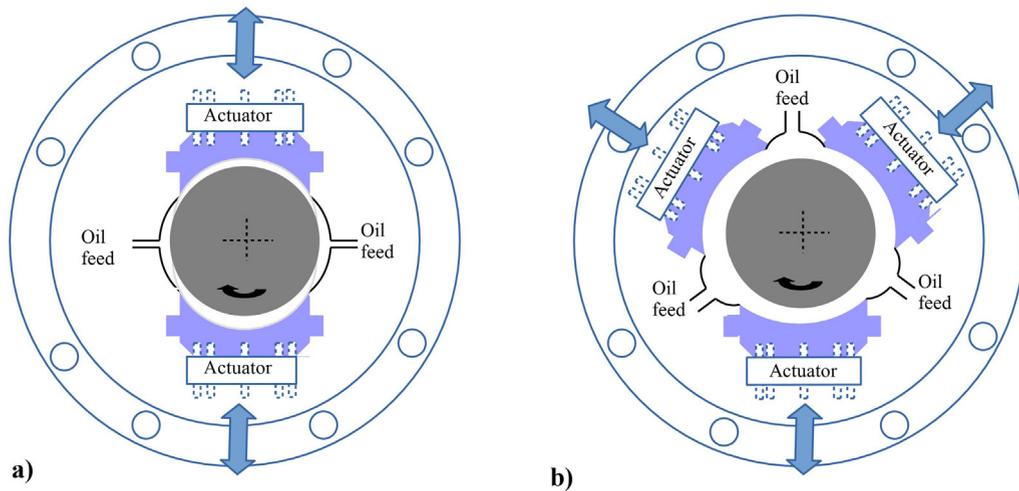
Bearing with a) two, b) three adjustable pads. Figure based on [114].
